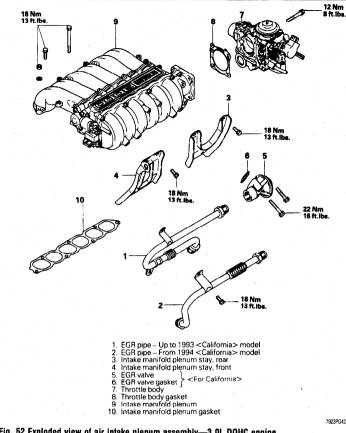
Exploded view of air intake plenum assembly-3.0L DOHC engine
